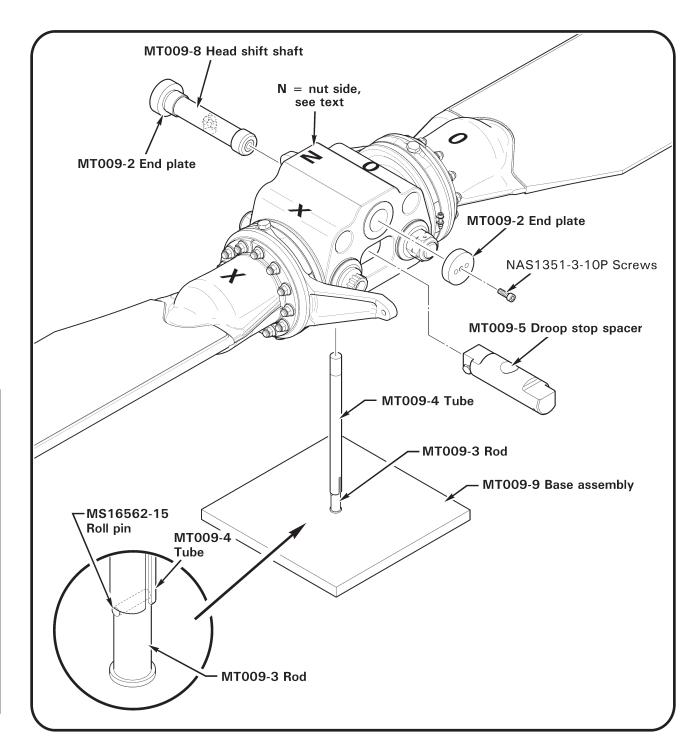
MT009-10 MAIN ROTOR STATIC BALANCE FIXTURE ASSEMBLY
